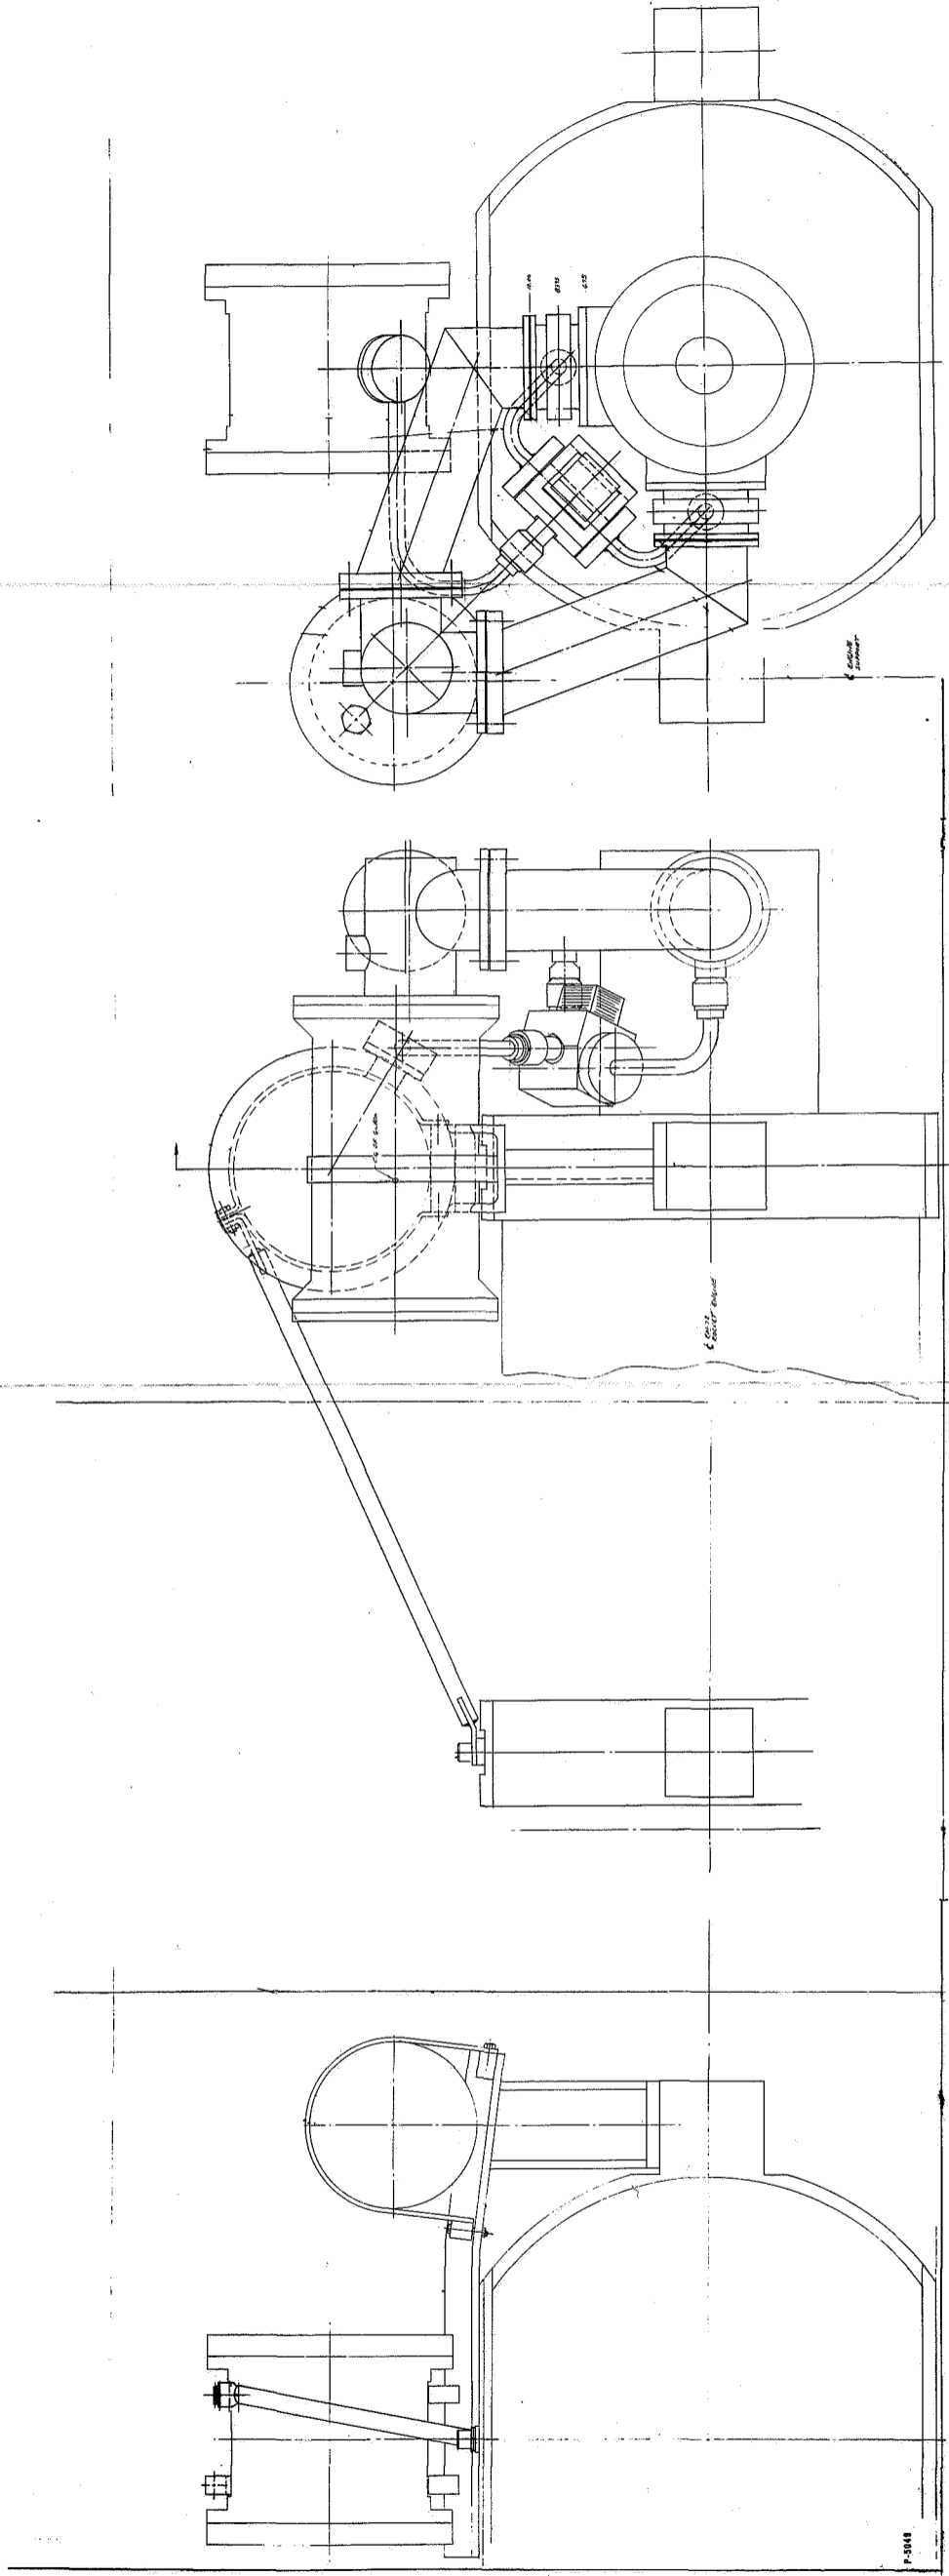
Vortex Valve Installation on the EM-72 Rocket Motor Nozzle.
